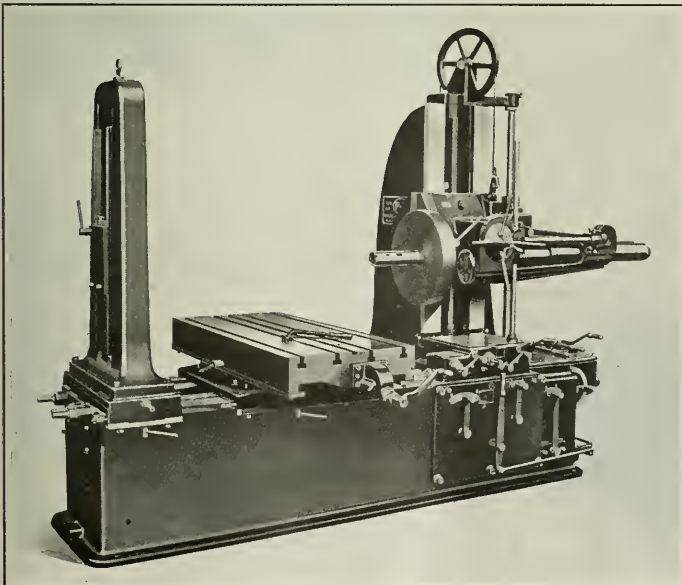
No. 3T Horizontal Boring, Drilling, and Milling Machine brought out by the Pawling & Harnischfeger Co.
